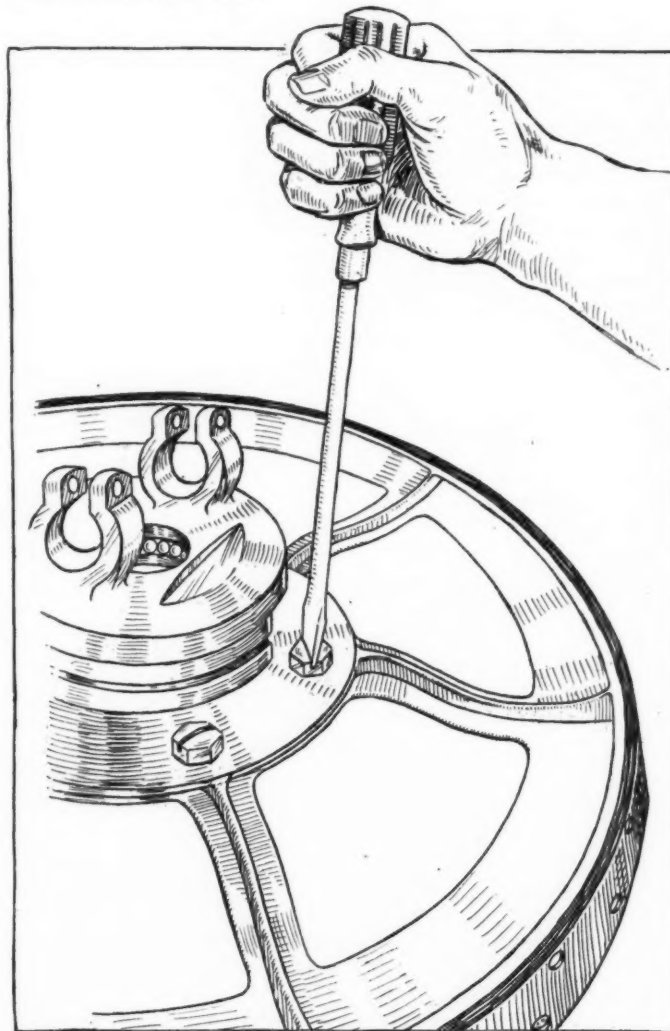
Removing screw to get at the spring of the clutch used on E-M-F
